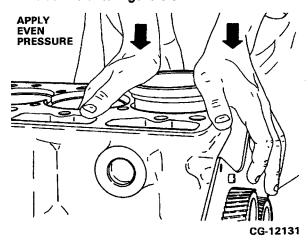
Install Cylinder Sleeve PISTON & ROD ASSEMBLY
